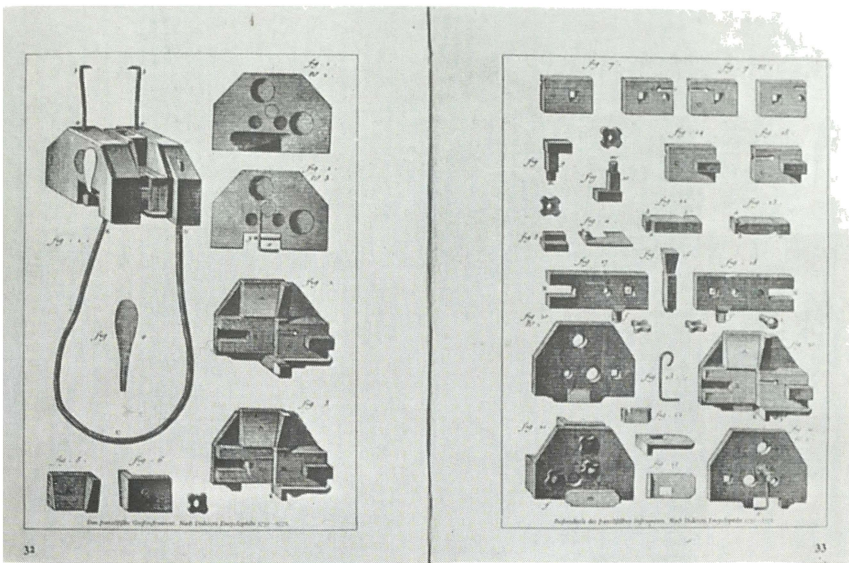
Plates in the *Encyclopédie* of Diderot and d'Alembert (1751-72) showing the typefounder's mould and its parts. Reduced.
